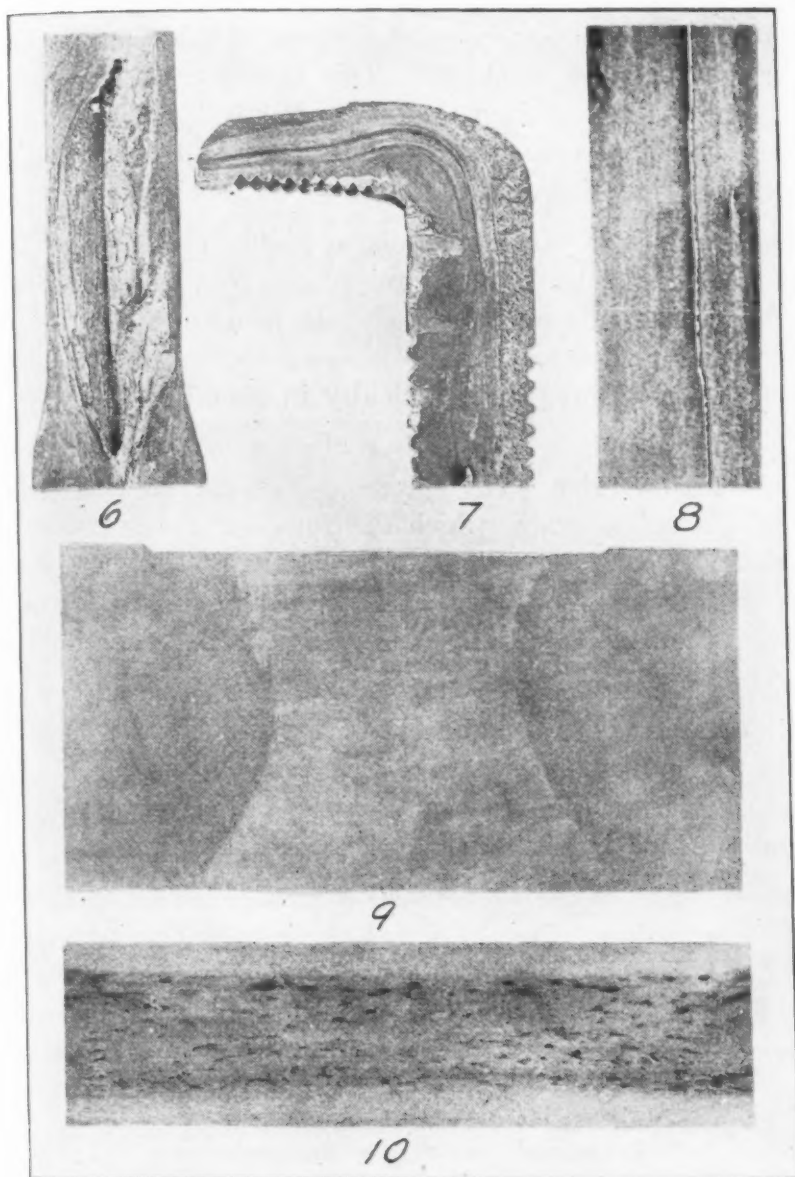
Photograph of a Pipe in a Forging. $\times 0.75$. Fig. 7—Photograph of a Wrench Jaw which Shows the Presence of a Pipe $\times 0.5$. Fig. 8—Shows a Seam in a High-Speed Steel Tool Bit. $\times 2$. Fig. 9—Shows a Thermit Weld Etched with Heyn's Reagent. $\times 0.5$. Fig. 10—Shows the Segregation in a Mild Steel, Etched with Ammonium Sulphate. $\times 0.5$.
